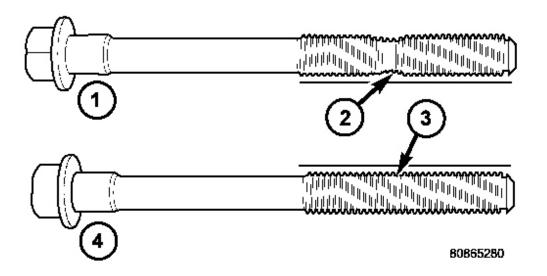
Checking Cylinder Head Bolts For Stretching (Necking)
